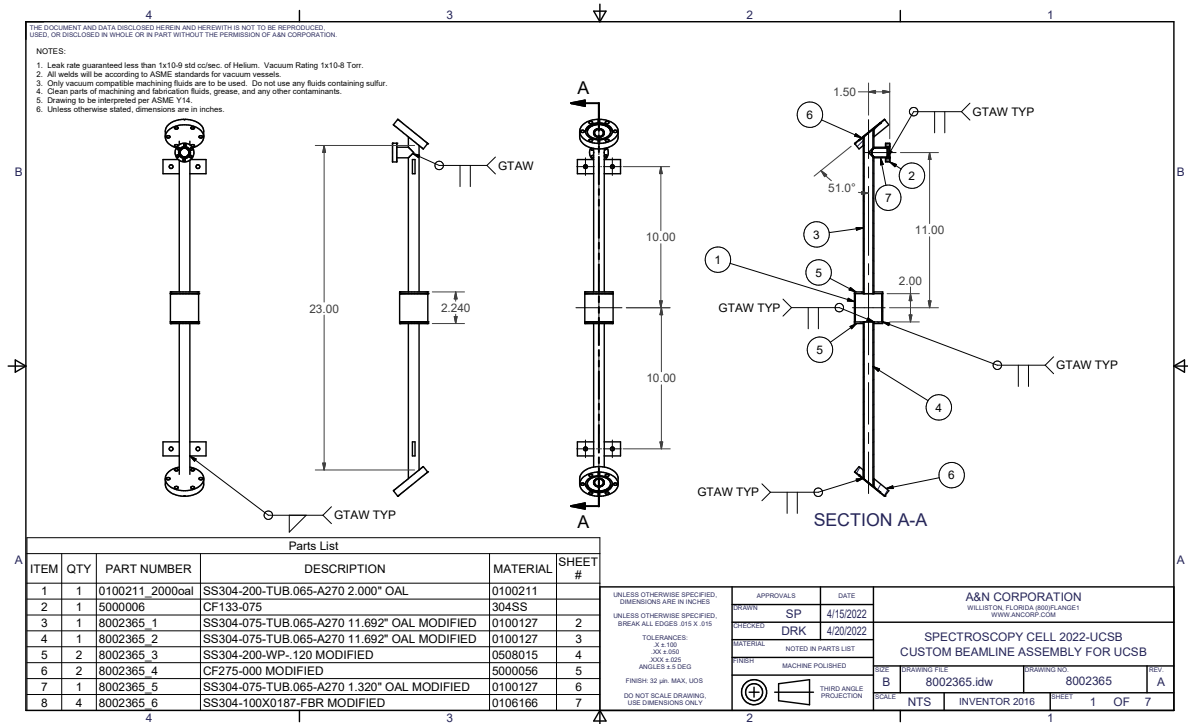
ANCORP Drawing 8002365 Rev A, Page 1
